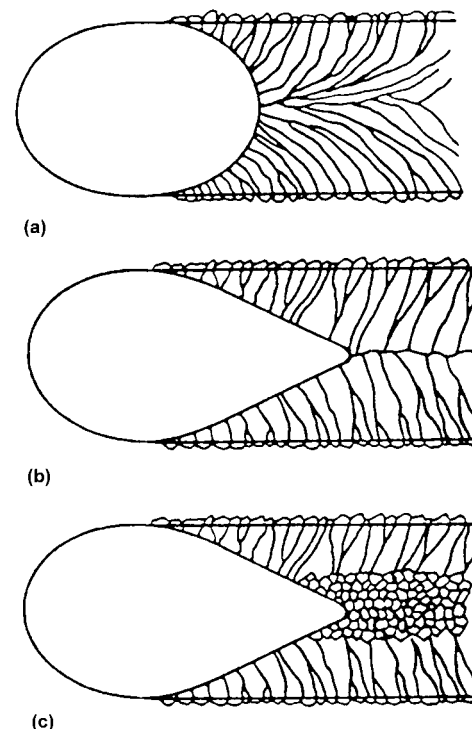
Types of grain morphologies that can form in fusion welds
